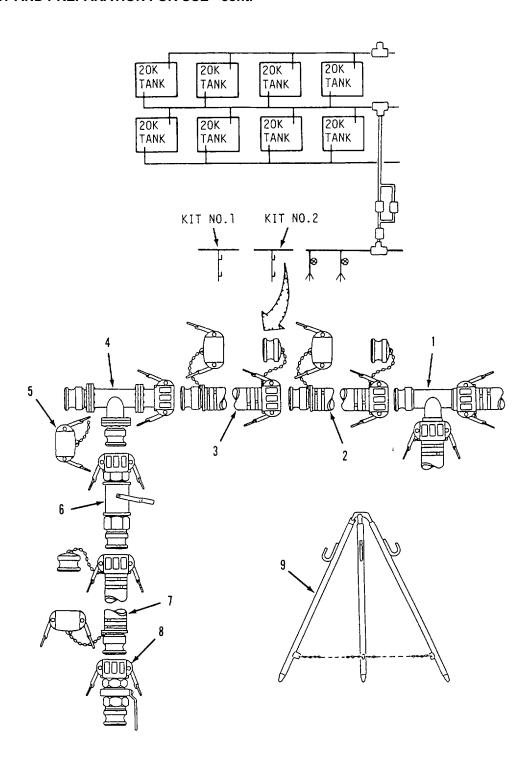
4-Inch Hose Connection Kit Assembly
